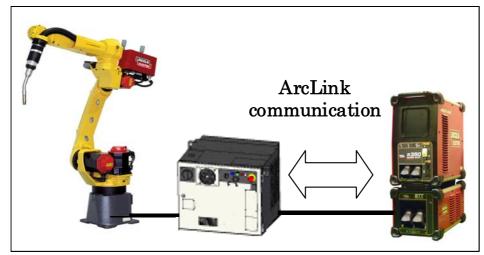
(a) Arc welding robot package (example: ROBOWELD 100iC/H3)
